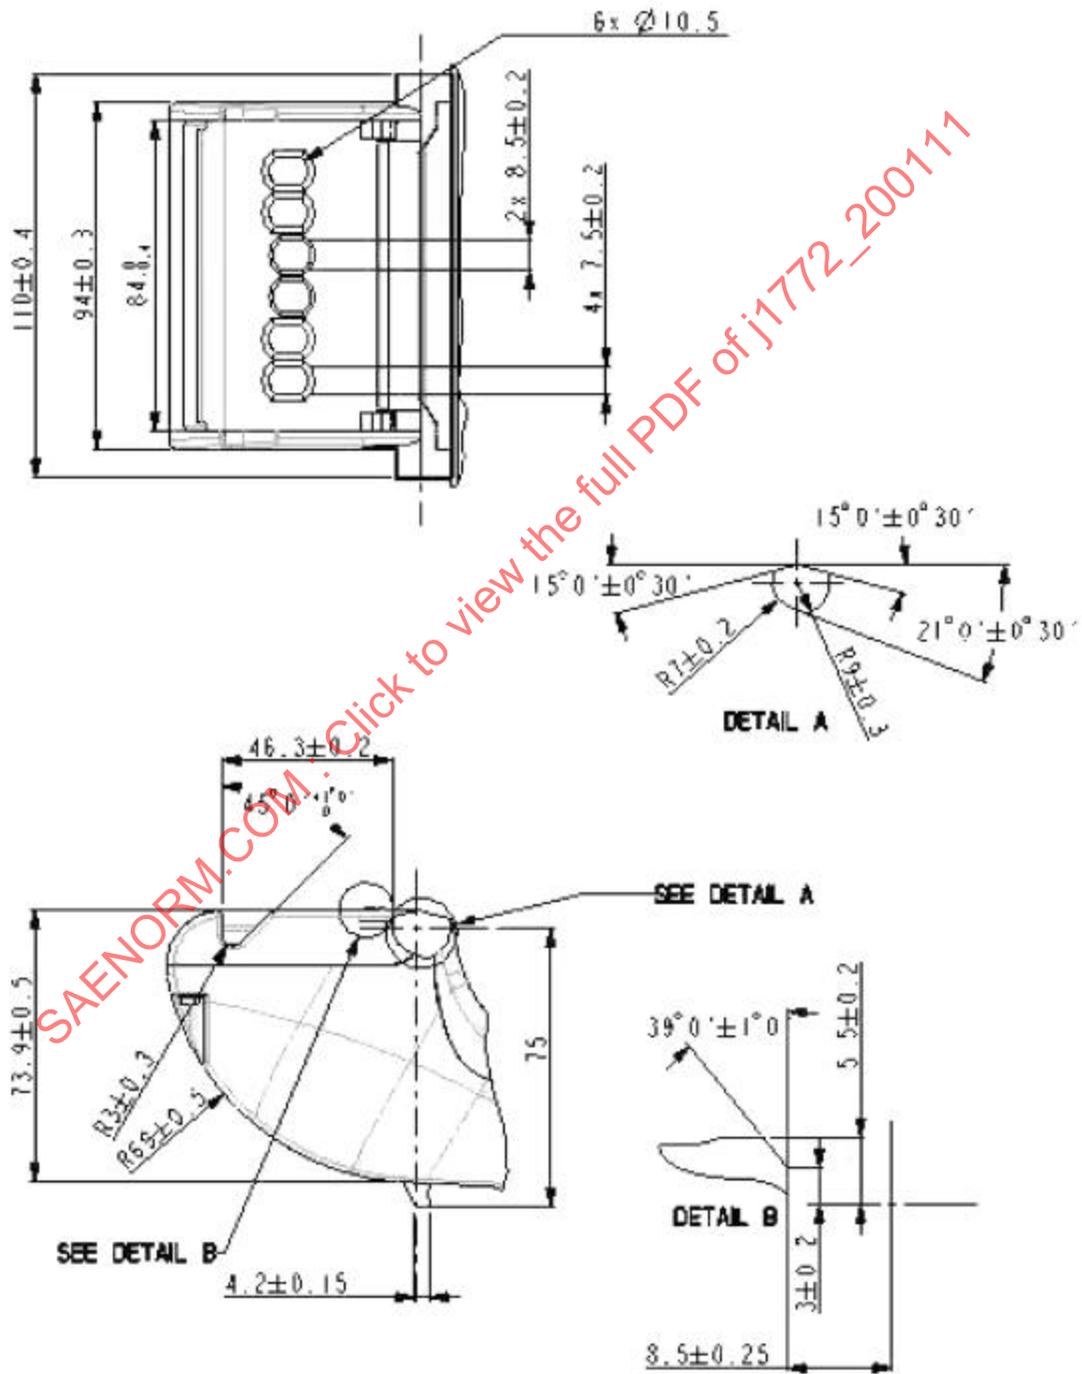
CONNECTOR PHYSICAL CONTROL DIMENSIONS
